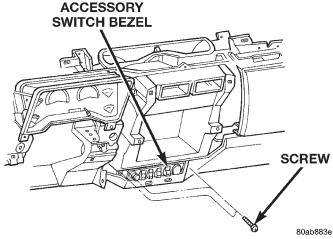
Instrument Panel Accessory Switch Bezel Remove/Install
